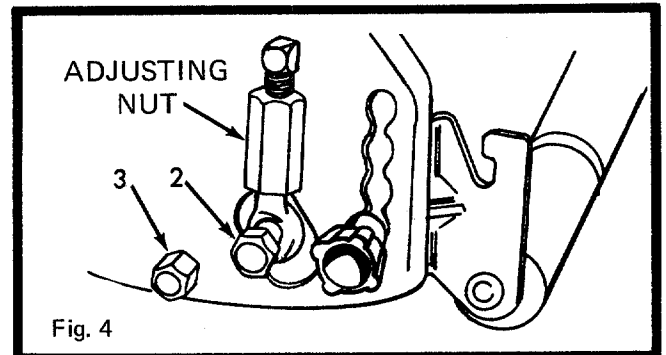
Cutter Bar bolts (2 & 3) are tapered and extend beyond the side plate slightly. When these tapered bolts are tight any end play or looseness is eliminated. Be sure these bolts are tight before making adjustments.
